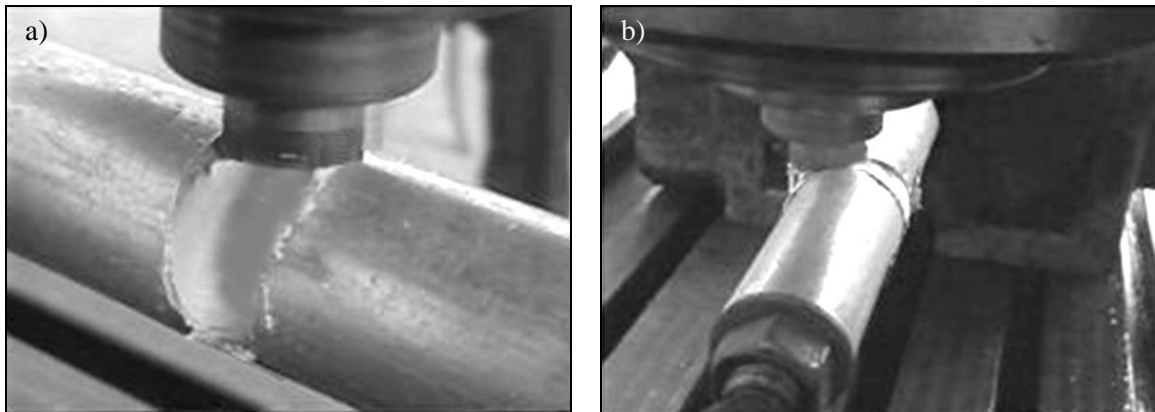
FSW, butt joint of two Al tubes. a) the tool reached the end of weld path and b) the FSW joint moves horizontally for withdrawing it from the tool.
